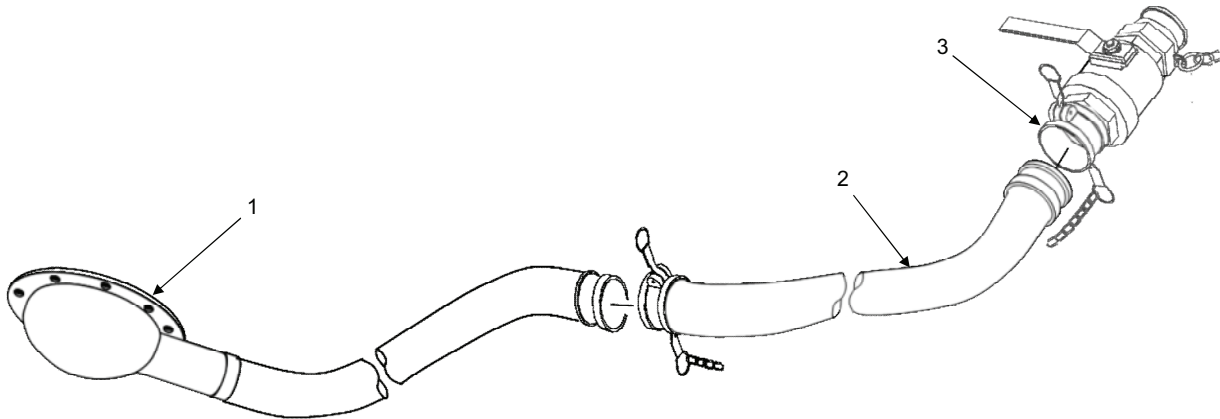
Berm Liner Drain Hose Assembly, Bowl x Cam, Drain Hose, and Berm Liner Ball Valve.
